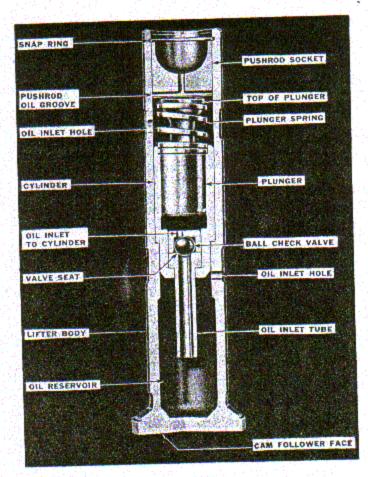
Cutaway View of Hydraulic Valve Lifter
